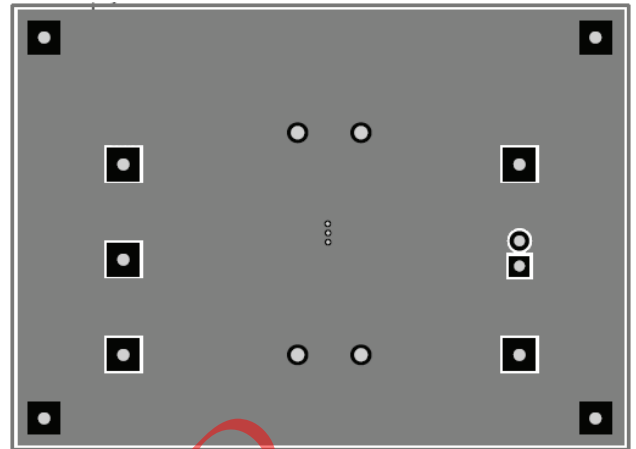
AAT4681IDE Evaluation Board Bottom Side Layout
